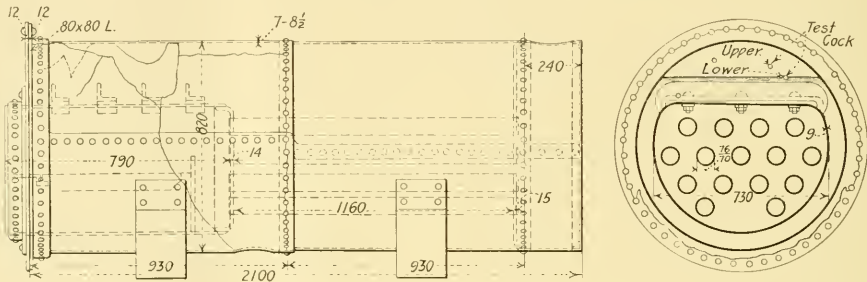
LOCOMOBILE BOILER WHICH EXPLODED
